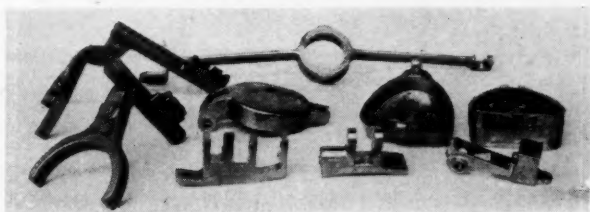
DIE CASTINGS OF ALUMINUM BRONZE.
